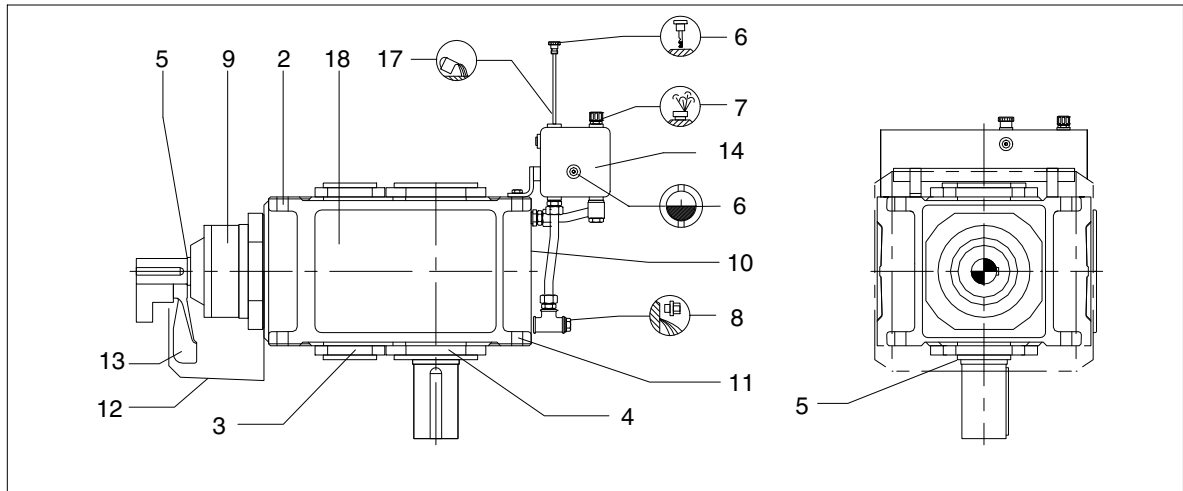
Gear-unit features on gear units type B..V with oil-equalising tank
